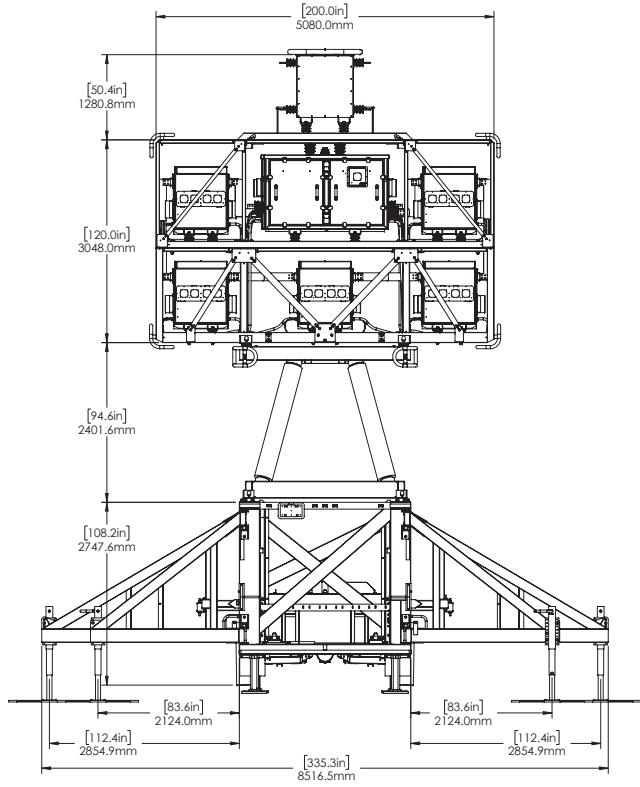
Mobile SmartValve Unit – Deployment Configuration Rear View
